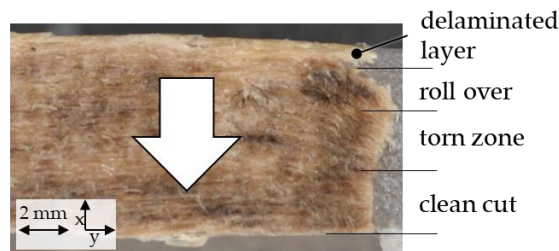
Cutting edge geometry of solid wood in the shear cutting process
